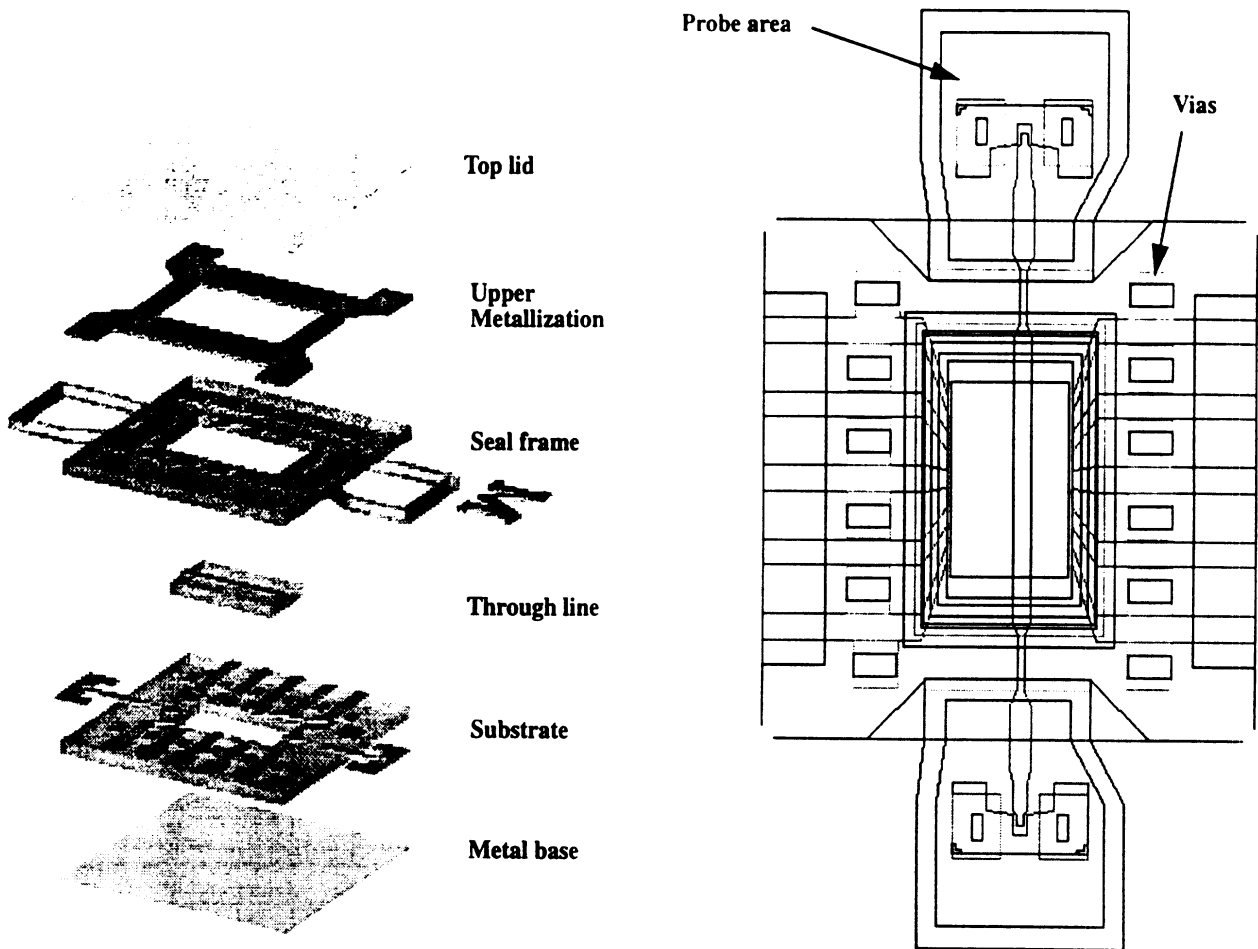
3-D view of package layers and actual CAD drawing with all layers superimposed.
